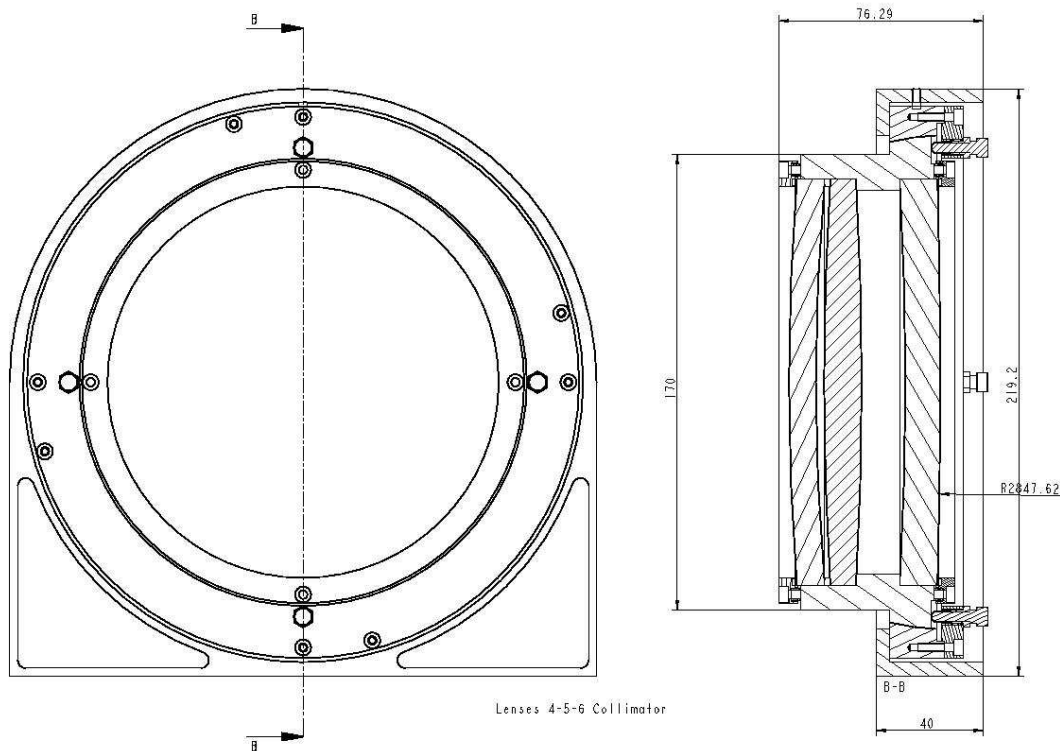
The mount sketch of Col\_4\_5\_6. The dimensions indicated shouldn't be exceeded.
